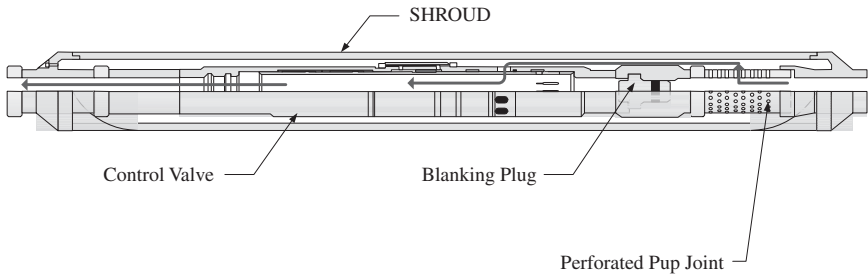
Flow direction in shrouded control valve. (Courtesy Baker Oil Tools)
